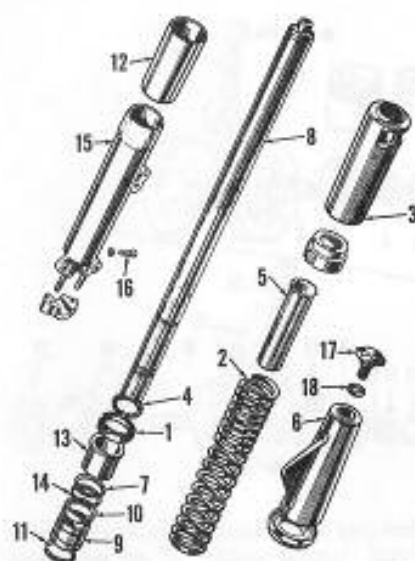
Exploded view of front suspension used on late CB models.
